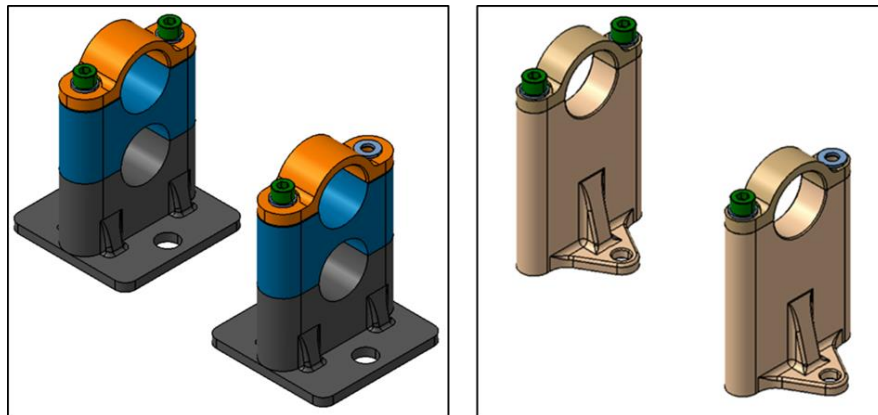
Steering rack supports - existing design (left) & modified design (right) - Solution 5
